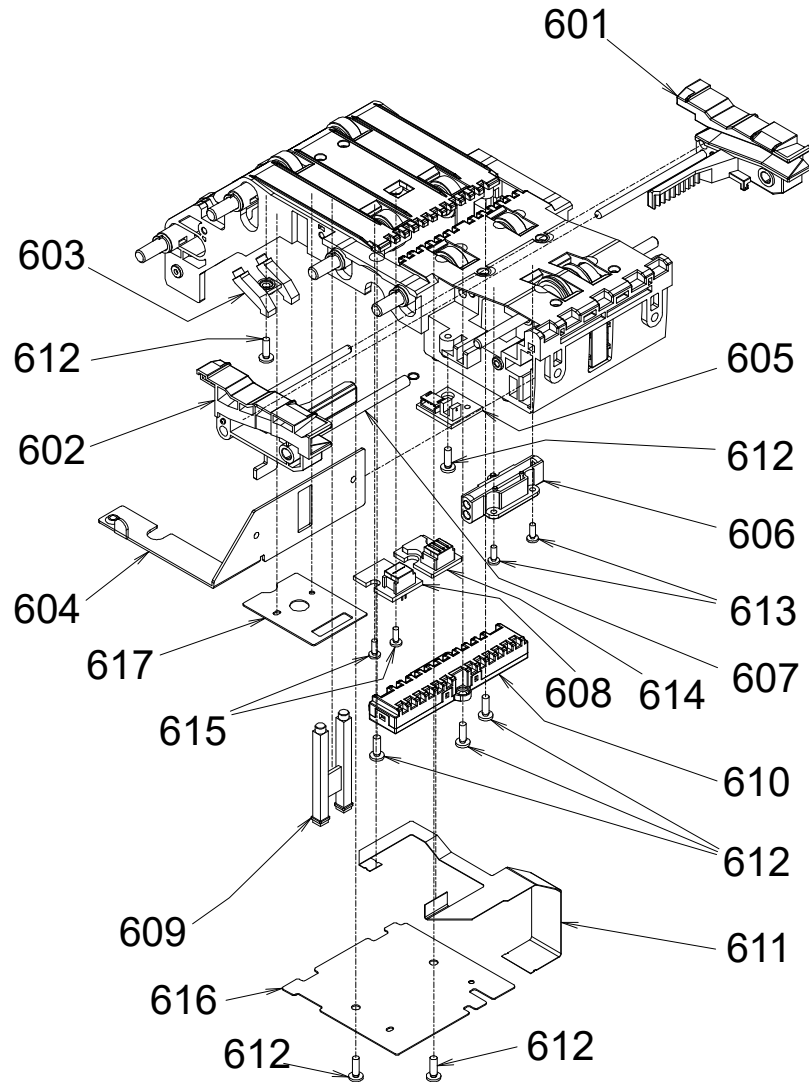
UBA Pro Transport Unit Exploded View 5
